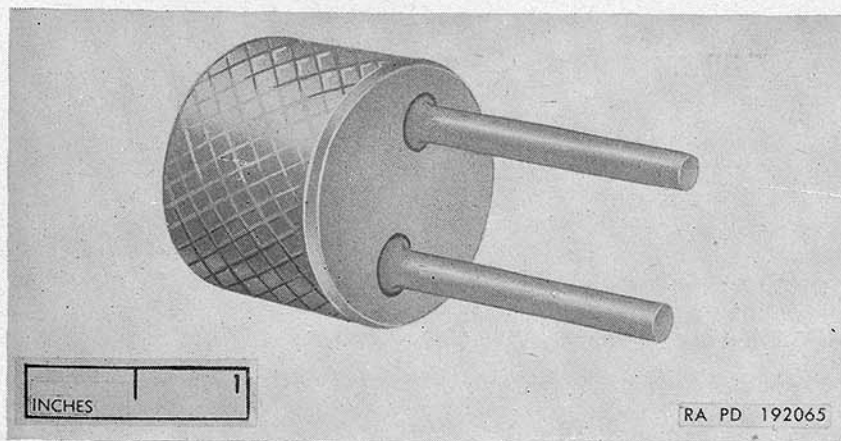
Drum shaft and barrel latches spring compressor—7188578.
